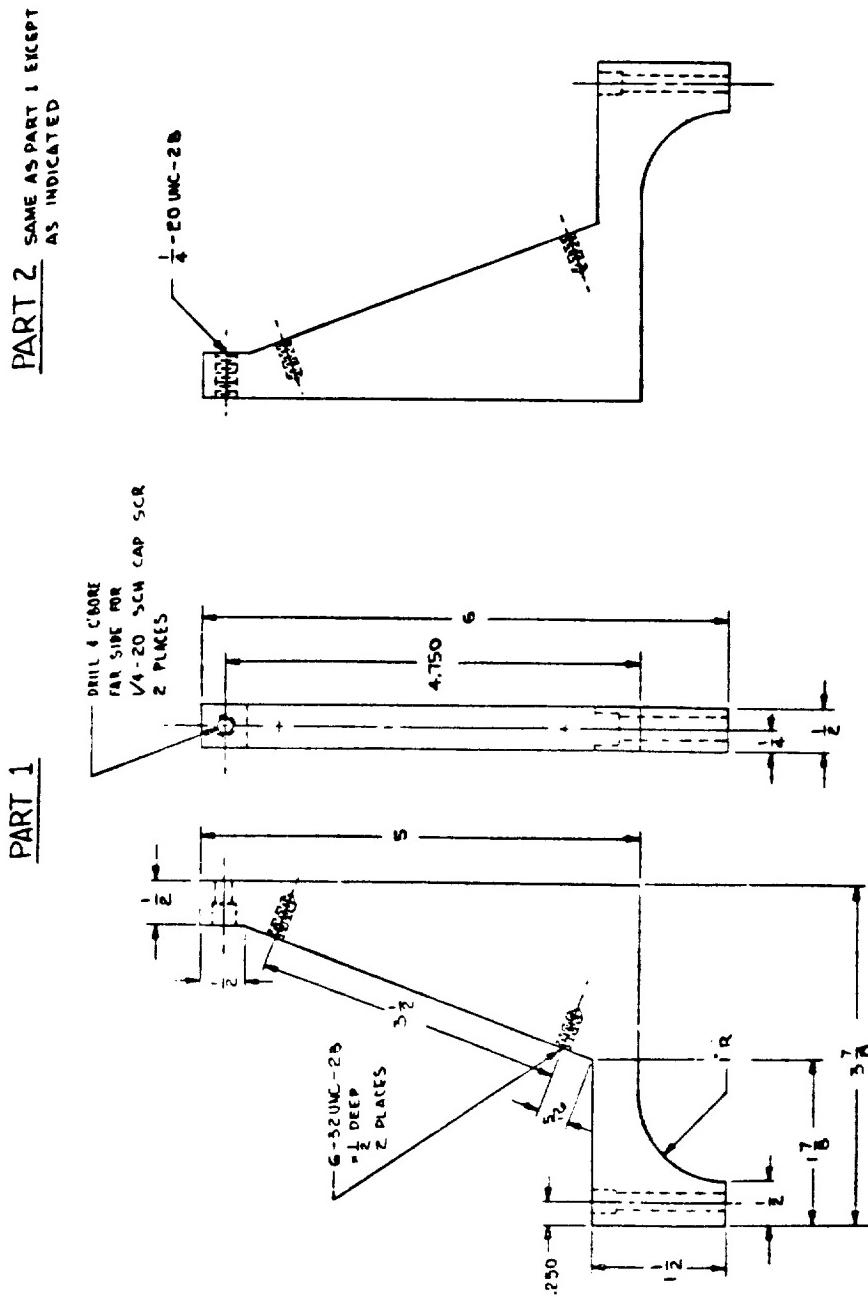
Cooling-Plate and Terminal-Strip Support Brackets
